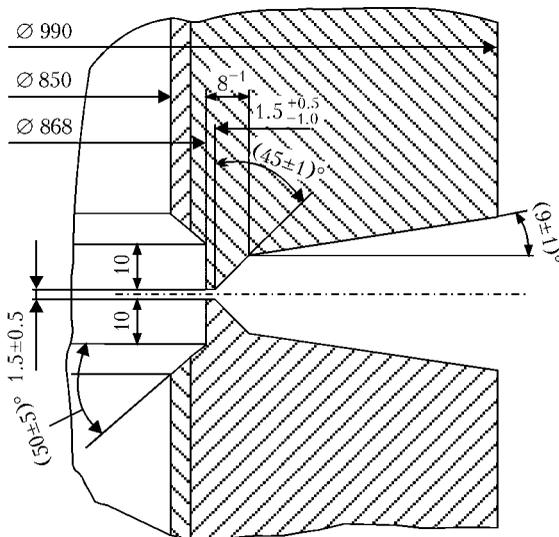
Schematic of edge preparation of pipe butt joint from clad steel welded by the standard technology
